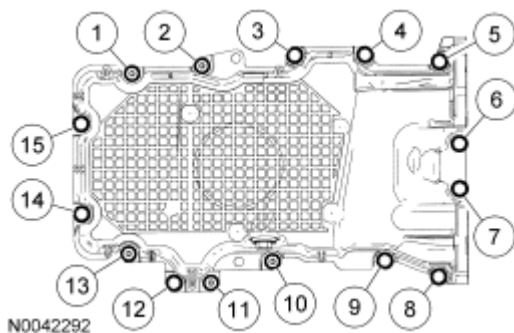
Identifying Tightening Sequence Of Oil Pan-To-Engine Bolts
